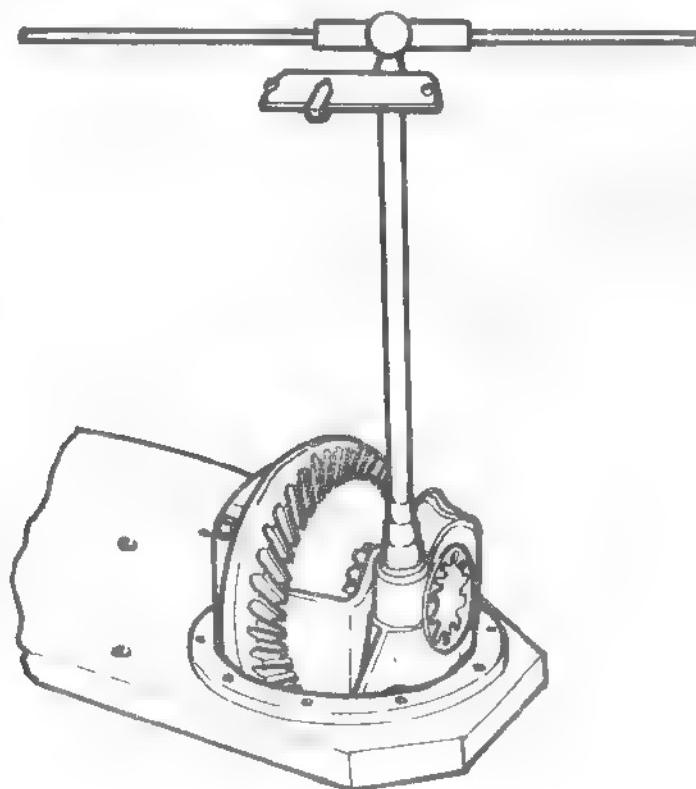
DIFFERENTIAL GEAR CLEARANCE ADJUSTING,
